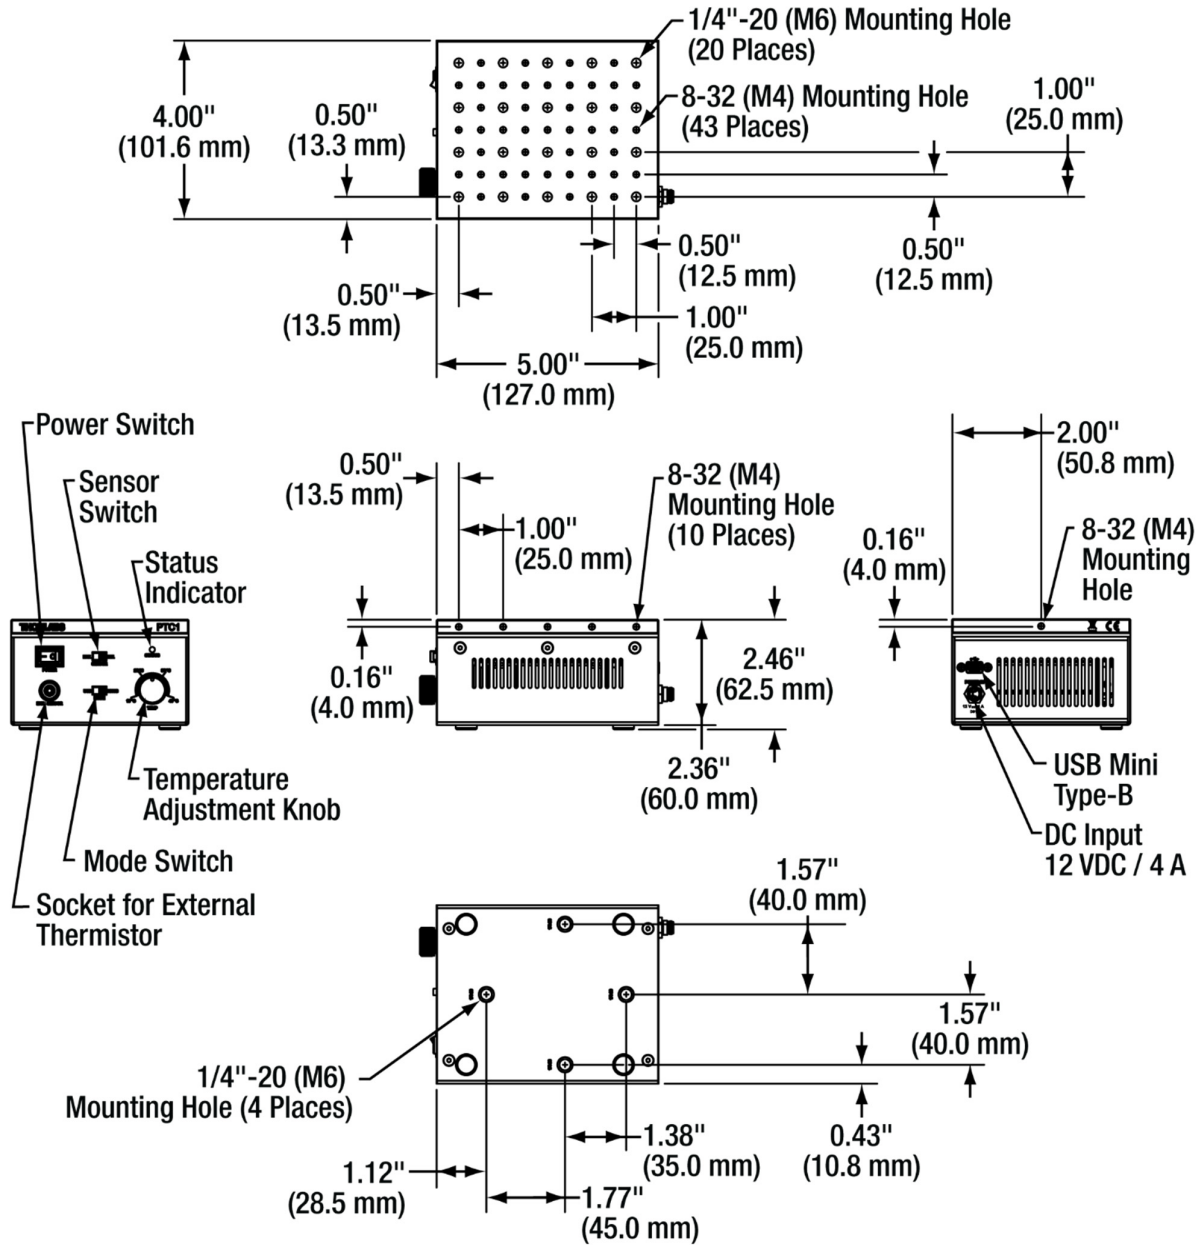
The mechanical drawing of the PTC1 is shown here. Dimensions and threading types on the PTC1/M are given in parentheses.
